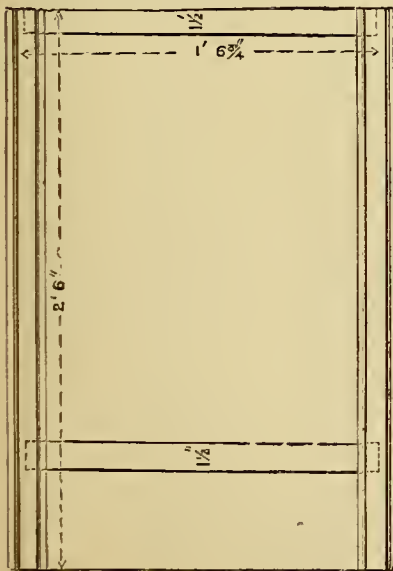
LEGS AND RAILS—FRONT ELEVATION.
